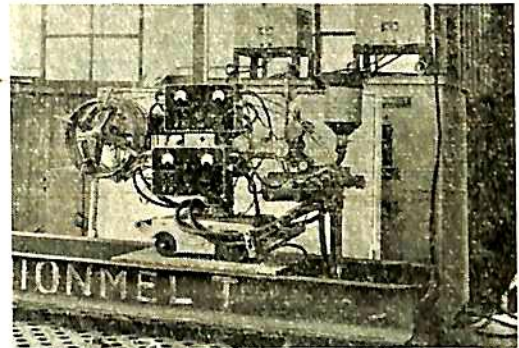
PORTABLE MULTI-PHASE AND MULTI-ELECTRODE WELDING MACHINE.⁶⁾
